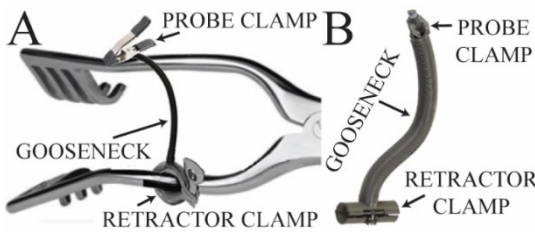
DESIGN OF THE PROBE HOLDER: (A) ANIMATED ON A SURGICAL RETRACTOR (B) CAD MODEL OF THE PROBE HOLDER
